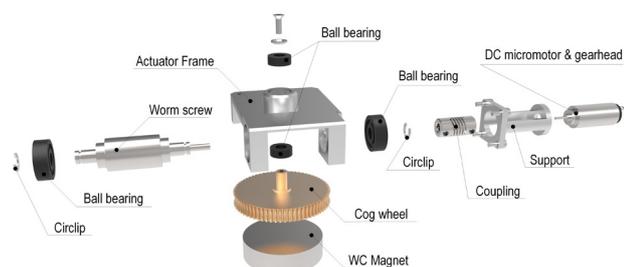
Magnet actuator driving of the Wearable Controller Device.
